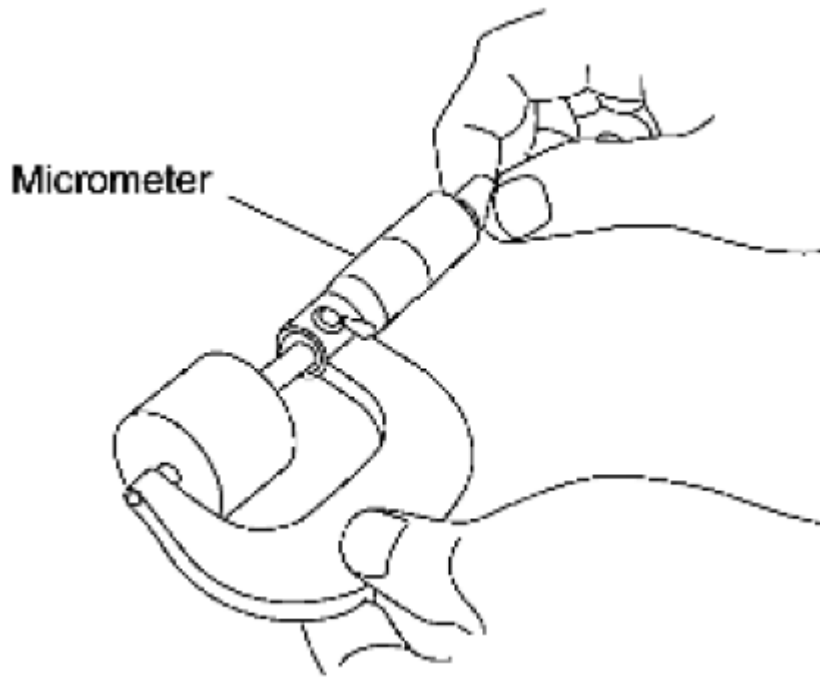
Measuring Center Thickness Of Removed Valve Lifters With Micrometer
